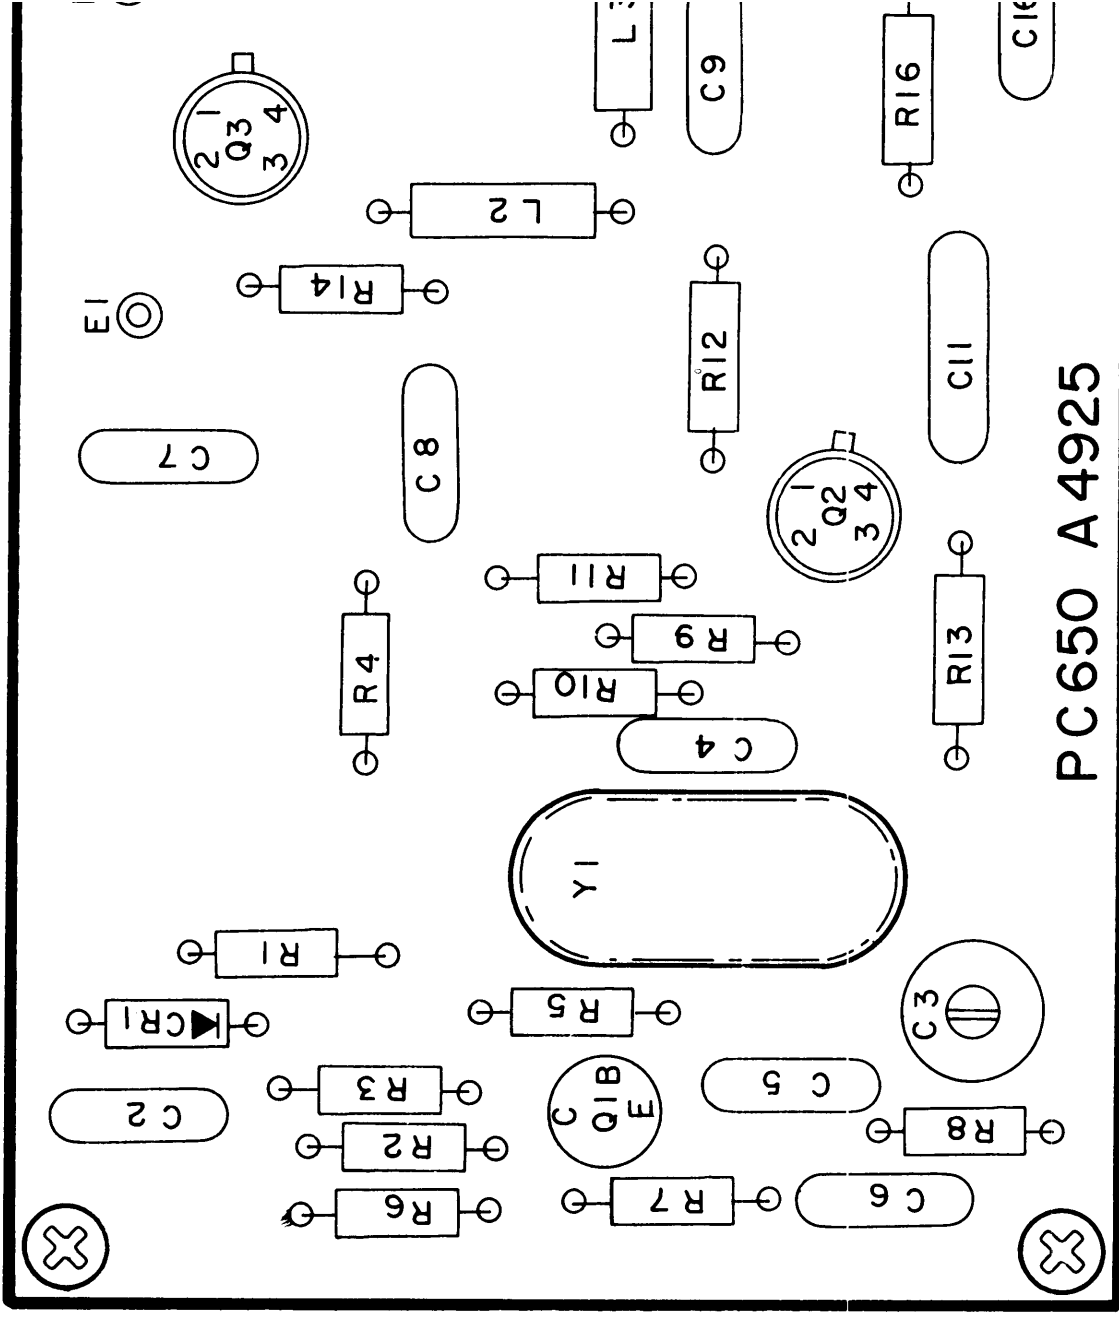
Fourth Mixer Assembly Z103, Component Location and Parts List
